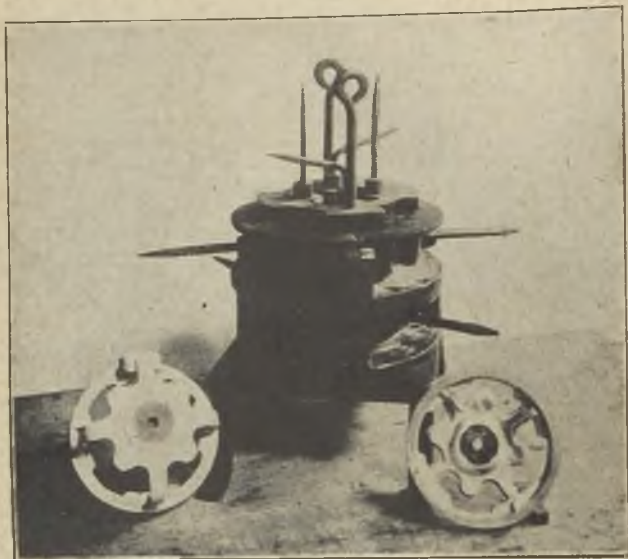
PERMANENT MOULD FOR MAKING DYNAMO-STARTER CASTINGS, ASSEMBLED (*Guillet*).
